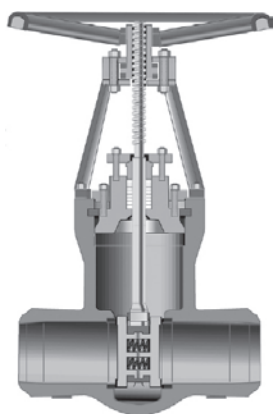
B-S Parallel Slide Disc, Butt Weld Ends
